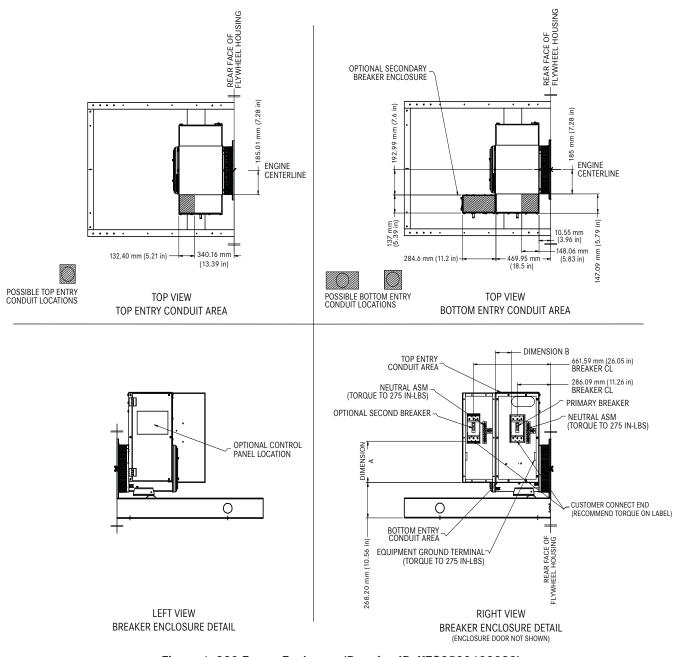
280 Frame Enclosure (Drawing ID: XZG2500100029)
